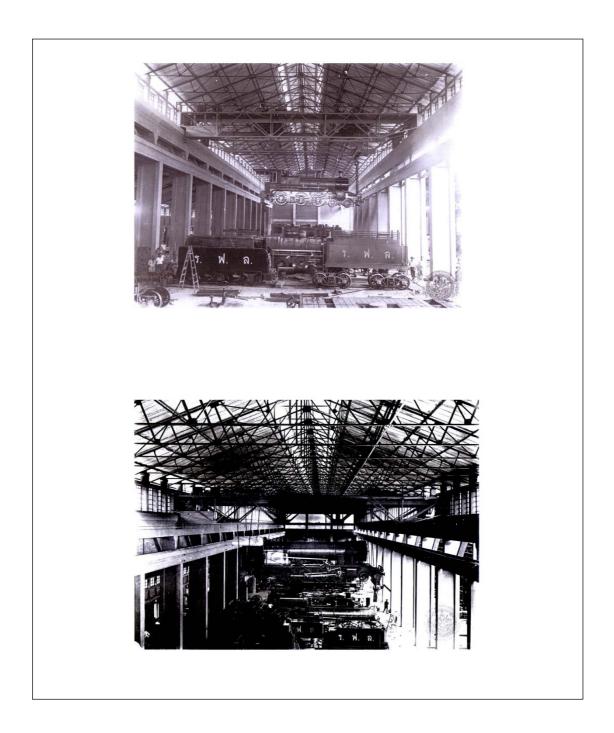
Showing the interior of The Foundry building containing the trains carrying the RSR emblem (Royal State Railways)
